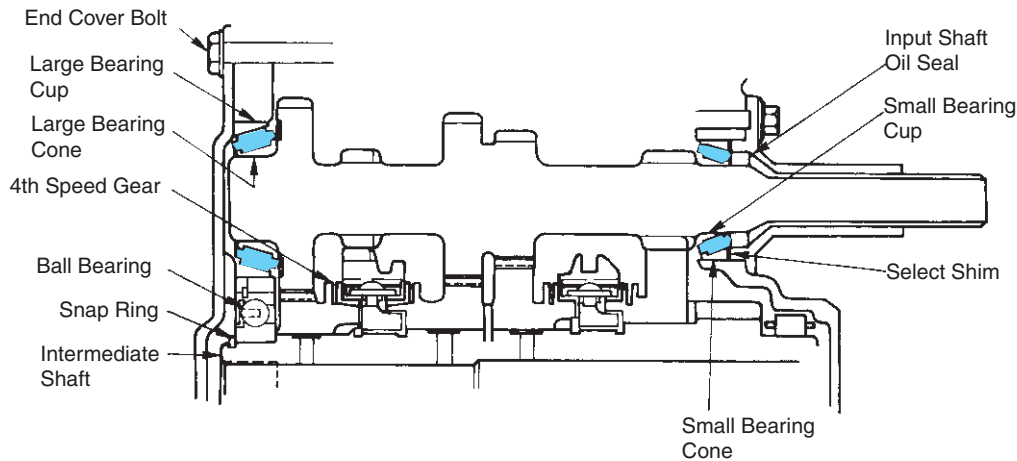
This transaxle uses tapered roller bearings at the input shaft. To adjust these bearings, the selective shim is located at each bearing set. (Courtesy of DaimlerChrysler Corporation)
